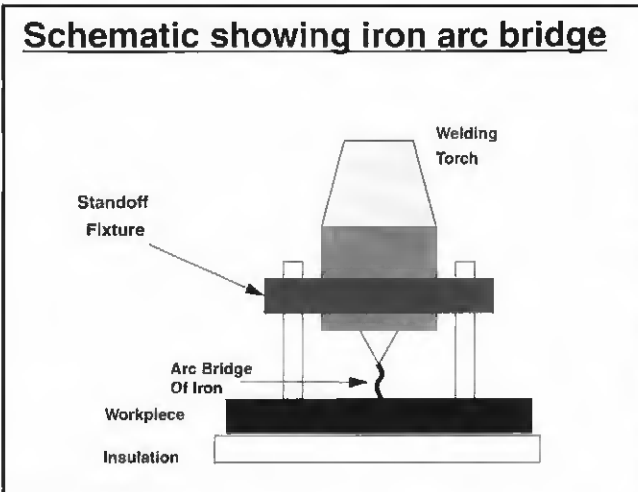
Schematic showing the addition of Fe to the Ni-270 weld pool.
